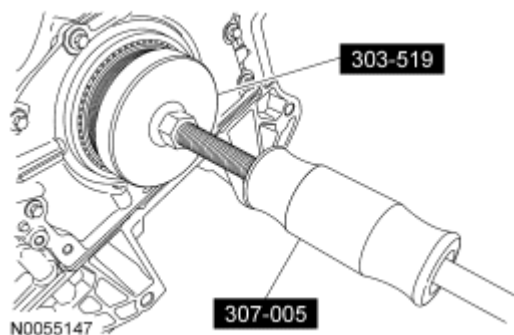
Removing Crankshaft Rear Seal Using Special Tools (303-519) & (307-005)
